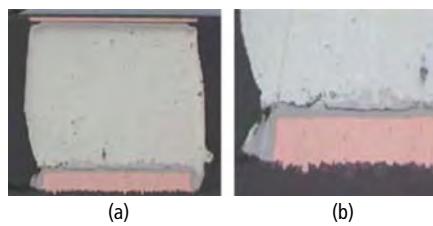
Cross-section images of (a) the outermost solder joint of 1st row, (b) crack on board side after bending test of 30,000 cycles
